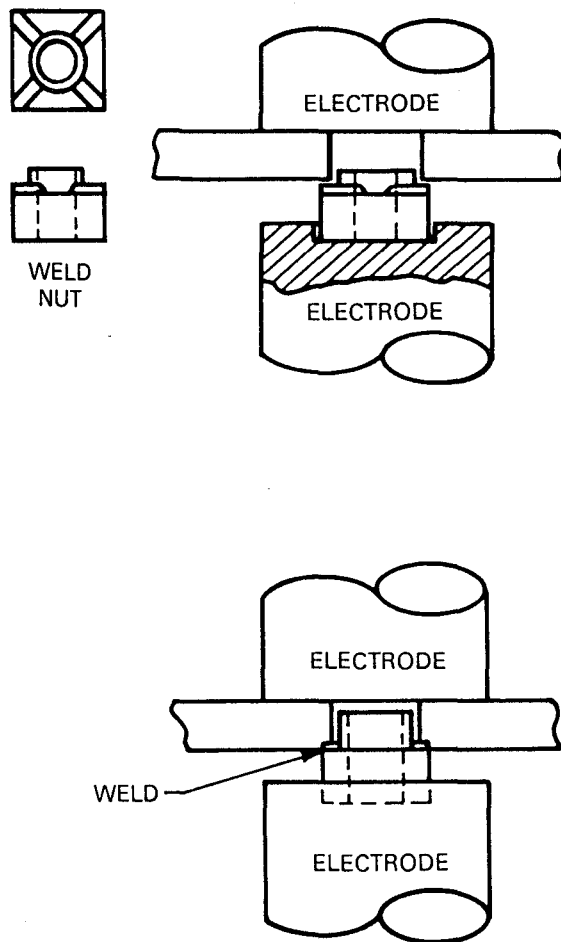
Use of a Recessed Electrode to Position a Weld Nut
